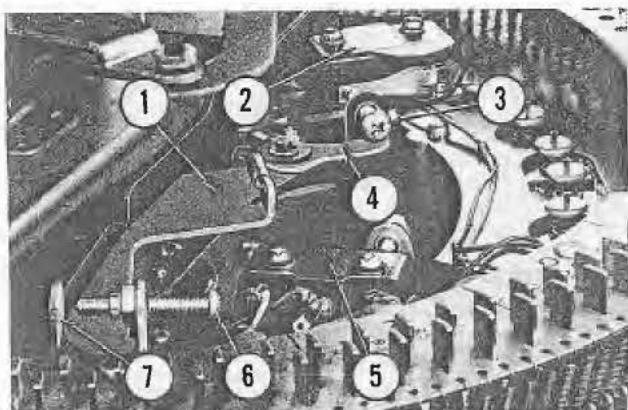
ACTUATING SCREW ADJUSTMENT, CARRIAGE SWITCH
